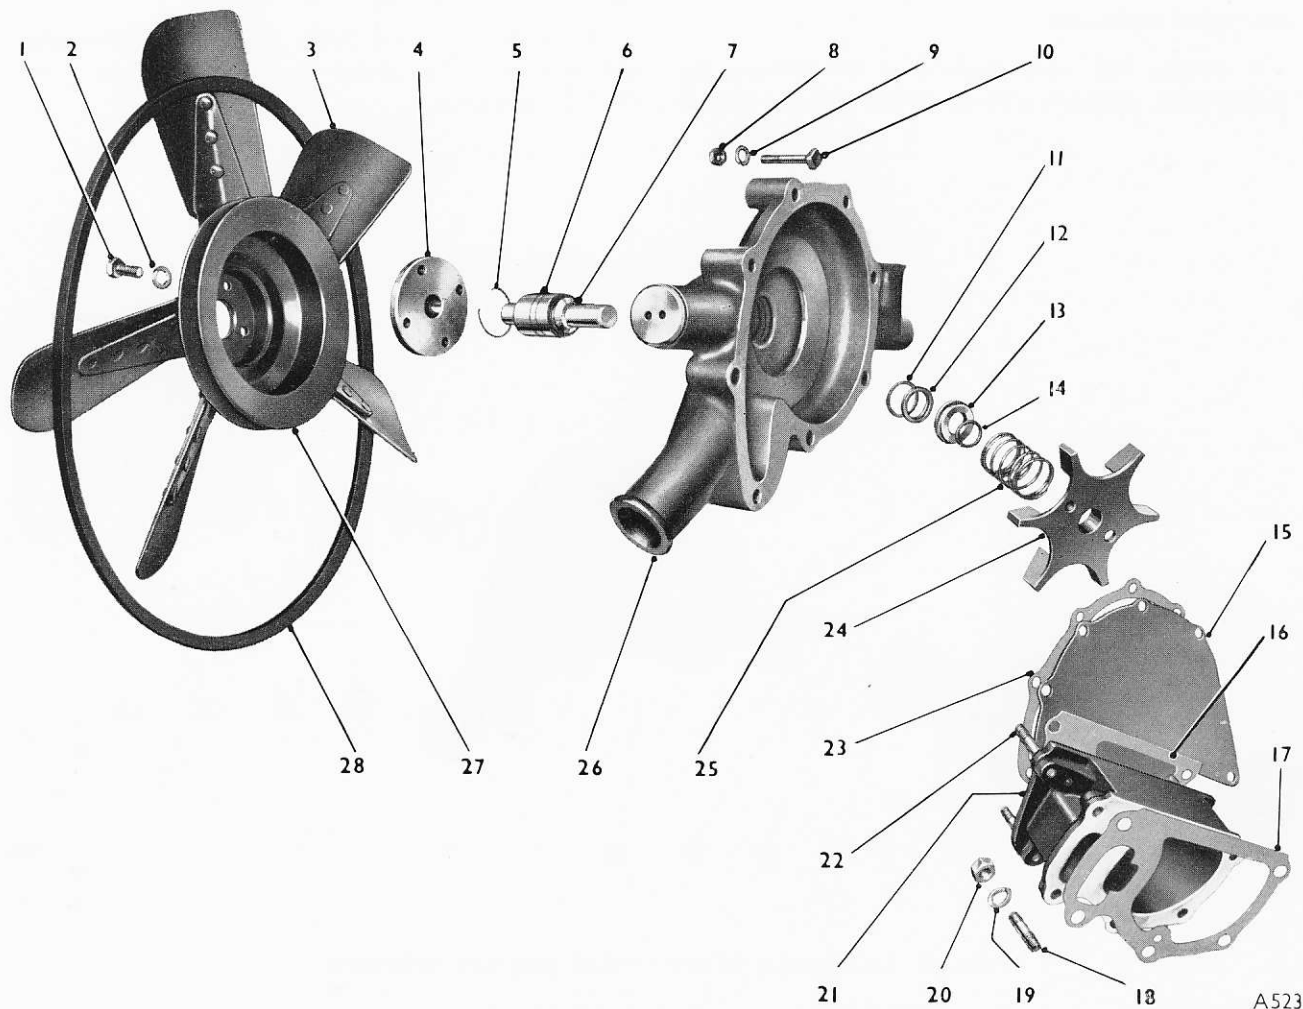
Exploded view S1 cars—coolant pump without refrigeration
